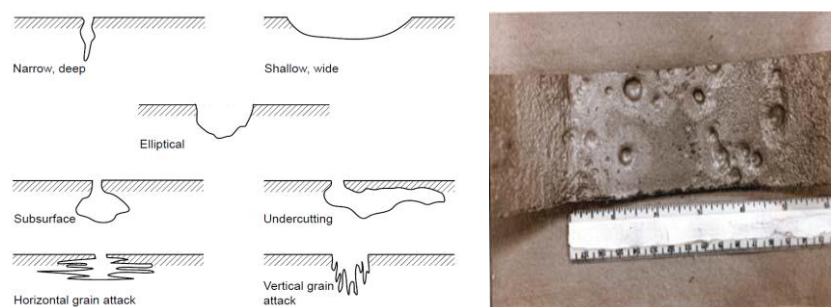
Left: different shapes of pitting corrosion defects in cross sectional view [26]. Right: pitting corrosion due to dissolved oxygen in Carbon Steel boiler tube [21].
